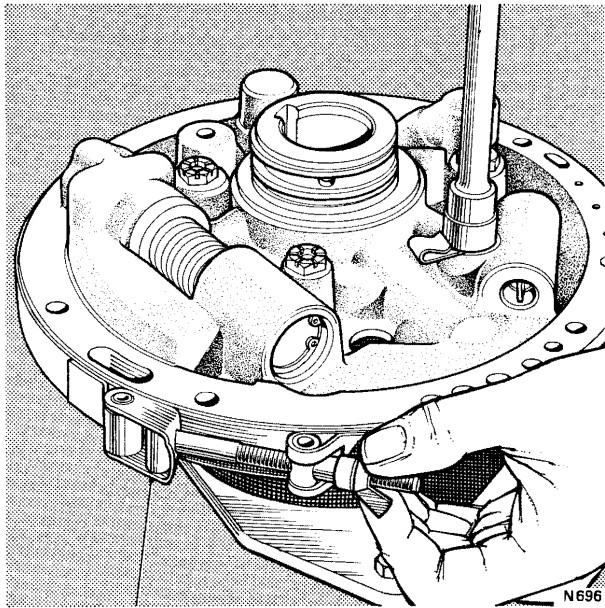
ALIGNING THE PUMP COVER WITH PUMP BODY
